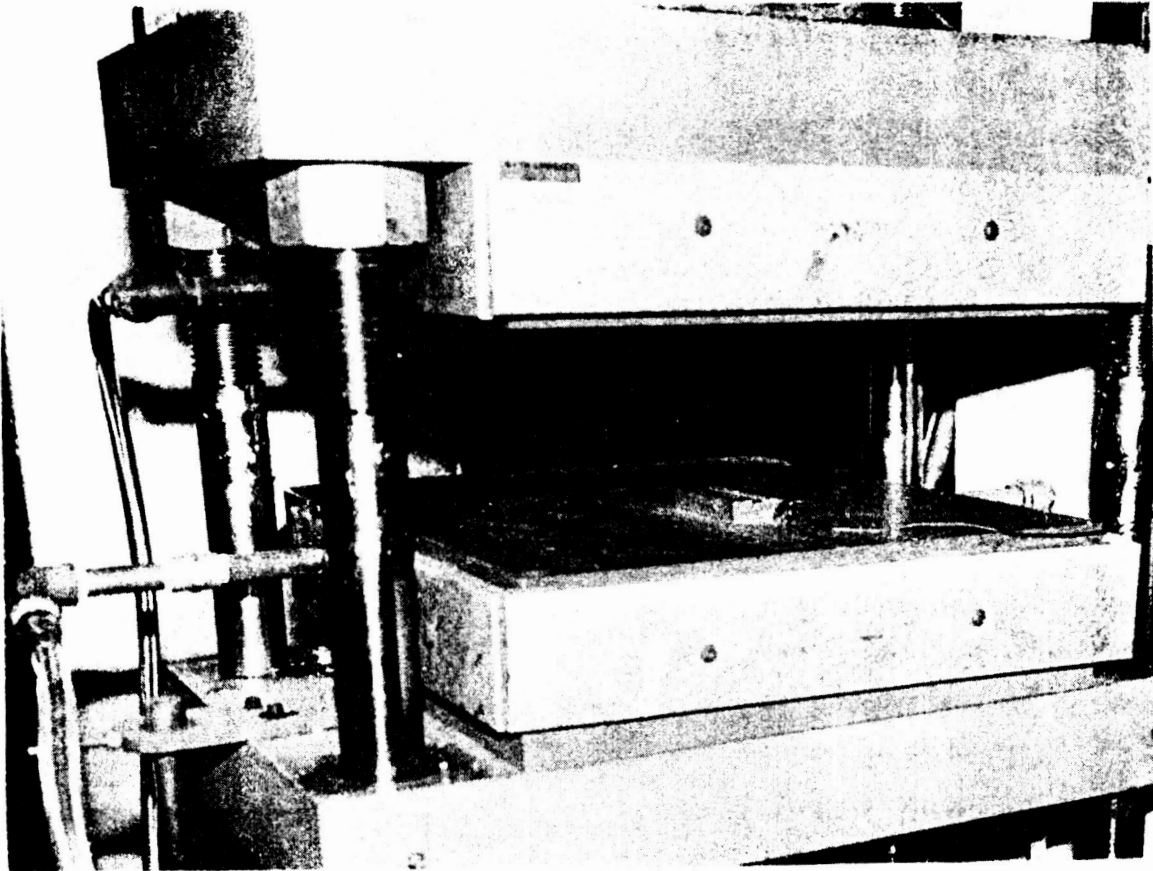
DCB specimen heating fixture in Wabash hot press.
